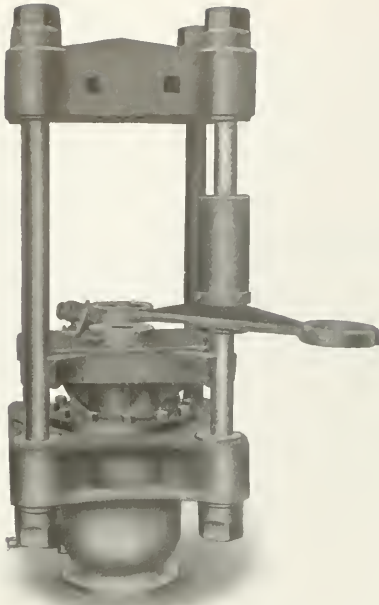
Shrapnel Shell Nosing Press made by the Hydraulic Press Mfg. Co.
